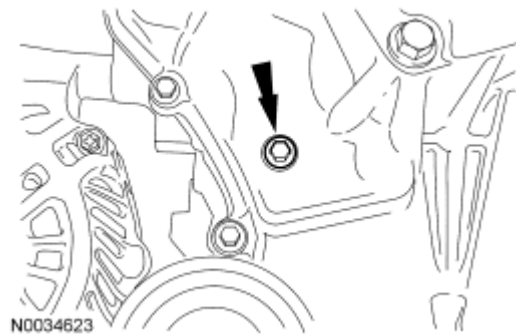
Locating Upper Front Cover Timing Hole Plug
